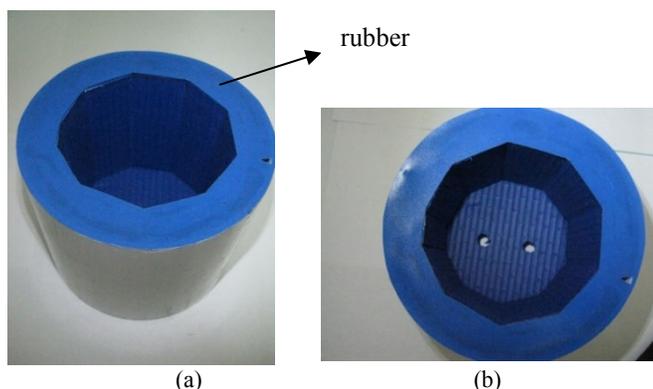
Rubber inside the casing: top view (a), side view (b)
